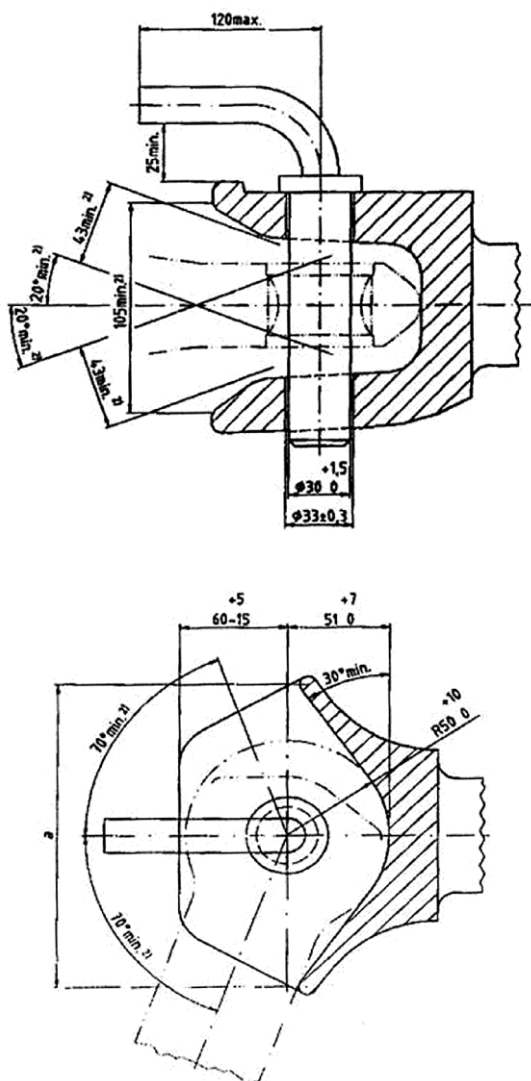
Non-automatic trailer coupling, with cylindrical locking pin
